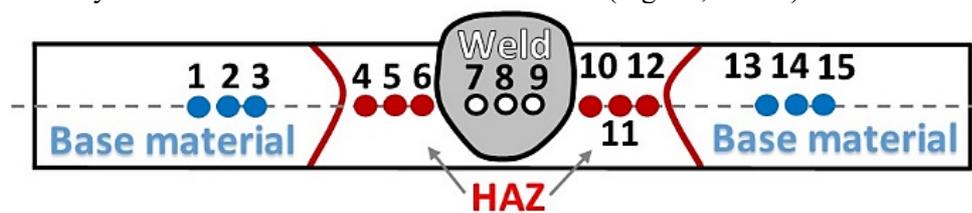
A scheme of the hardness measurements for the welded joint manufactured at the micro-jet cooling
